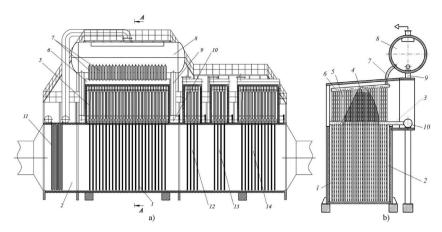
Sectional thermosiphon WHB for a CCPP (not to scale) [20]: a) longitudinal section; b) cross-section; 1 – evaporation zone of thermosiphons; 2 – gas duct; 3 – feeder pipes; 4 – condensation zone of thermosiphons; 5 – evaporator riser pipes; 6 – steam collection pipes; 7 – steam outlet pipes; 8 – steam drum; 9 – downcomer pipes; 10 – water collector; 11 – coil superheater; 12 – thermosiphon economizer; 13 – thermosiphon gas condensate heater; 14 – thermosiphon water heater.
